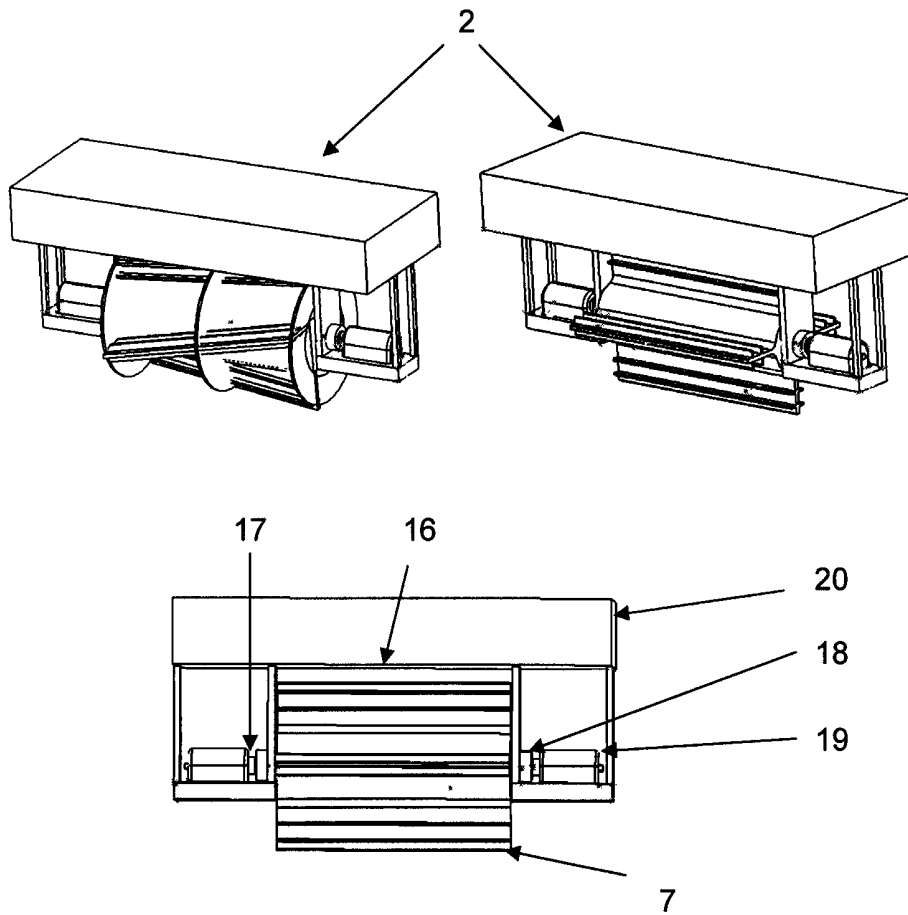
Isometric and Side Elevation View of the Removable Rotor Assembly
